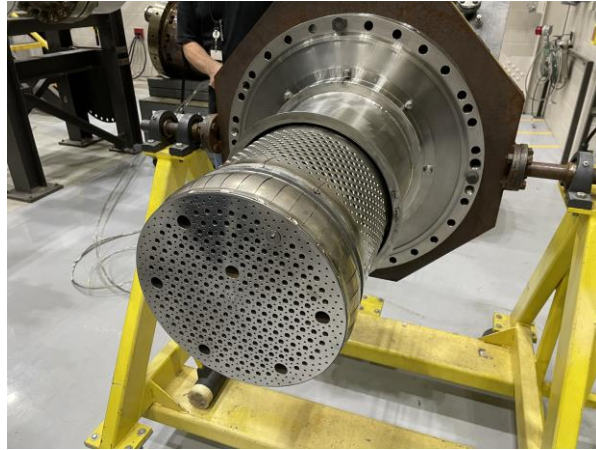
Compact Flame Micro Mixer Head End Assembly
